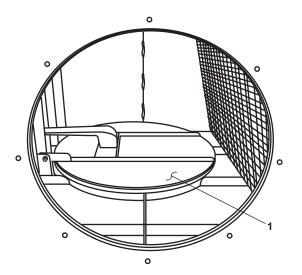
Engine Room Ventilation Exhaust Fire Flap Assembly
